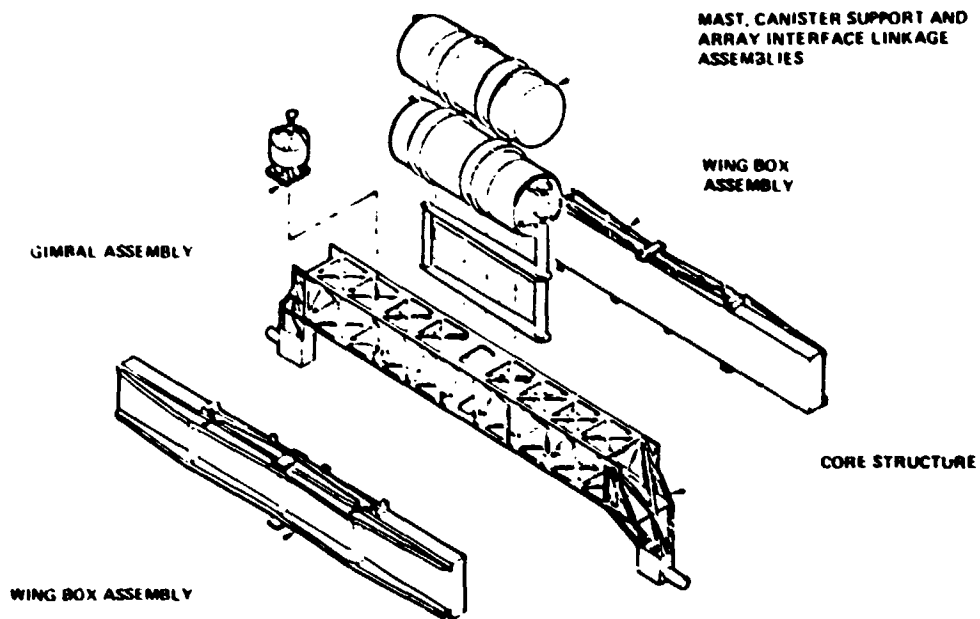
Subassembly Concept for Integral Box Configuration
